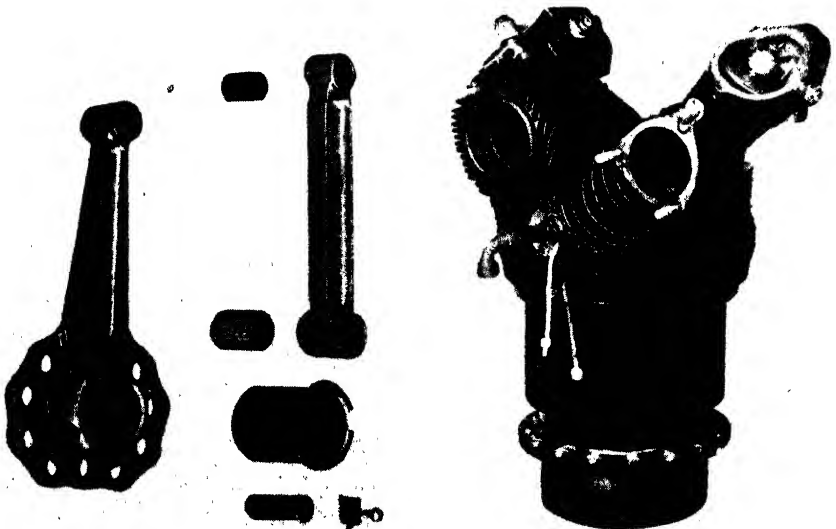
Wasp master connecting rod, one link connecting rod, with accessory pins and bushings.
